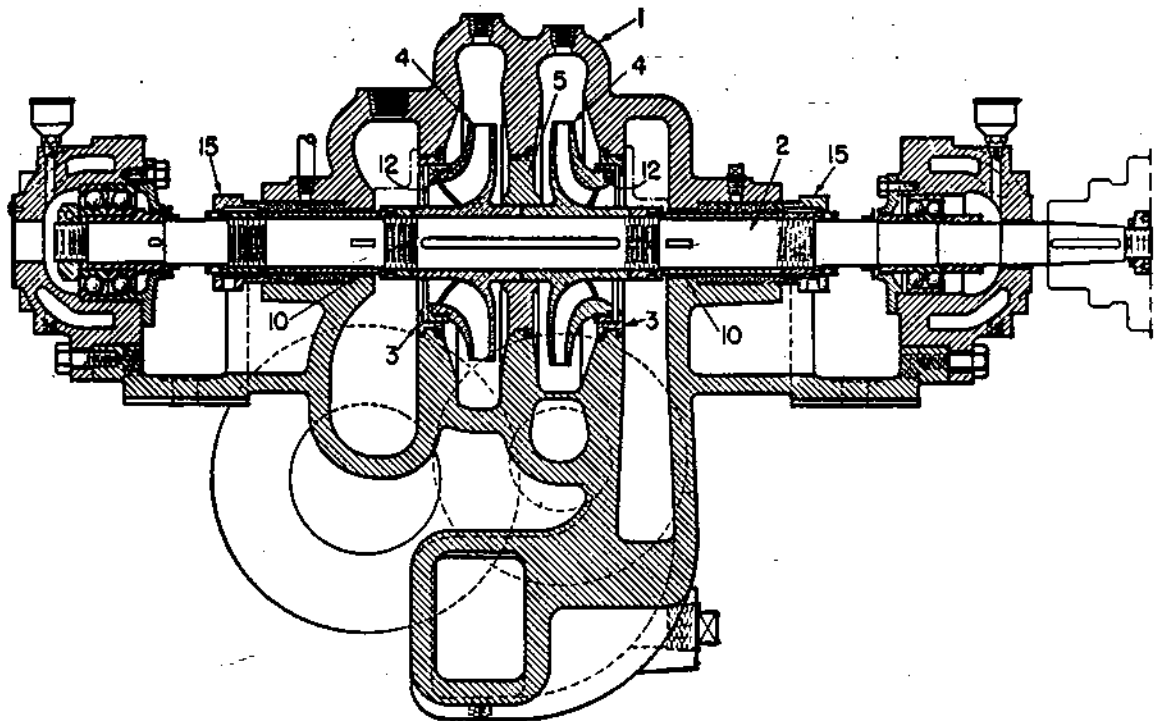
Sectional view of a multistage closed-impeller centrifugal pump with parts identified by numbers (see text and table).
